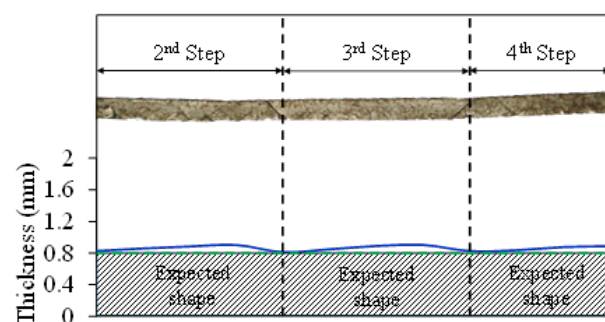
Side view of the subsequent steps of successive forging on JSC1180YN UHSS sheet
